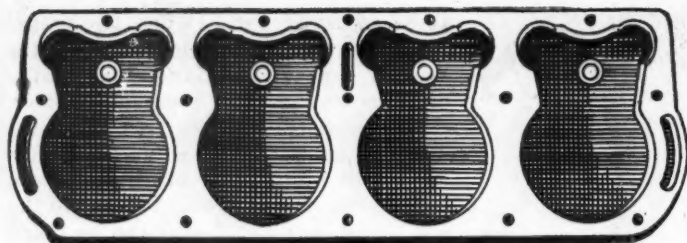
View of Ford cylinder head of the low type showing where metal must be removed to accommodate Fordson valves.
